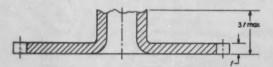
Light hubs may be formed by extruding the center hole. The ID can be held to very close tolerances, but the end of the extrusion will be ragged and no precise height can be held.
